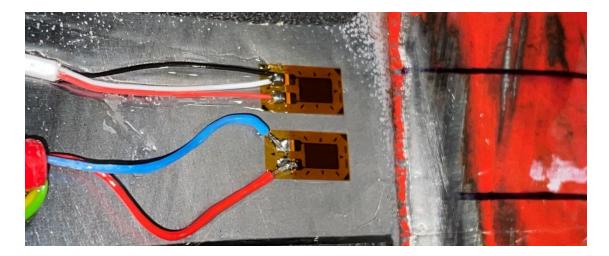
strain gauges near the butt-welded plate joint.
